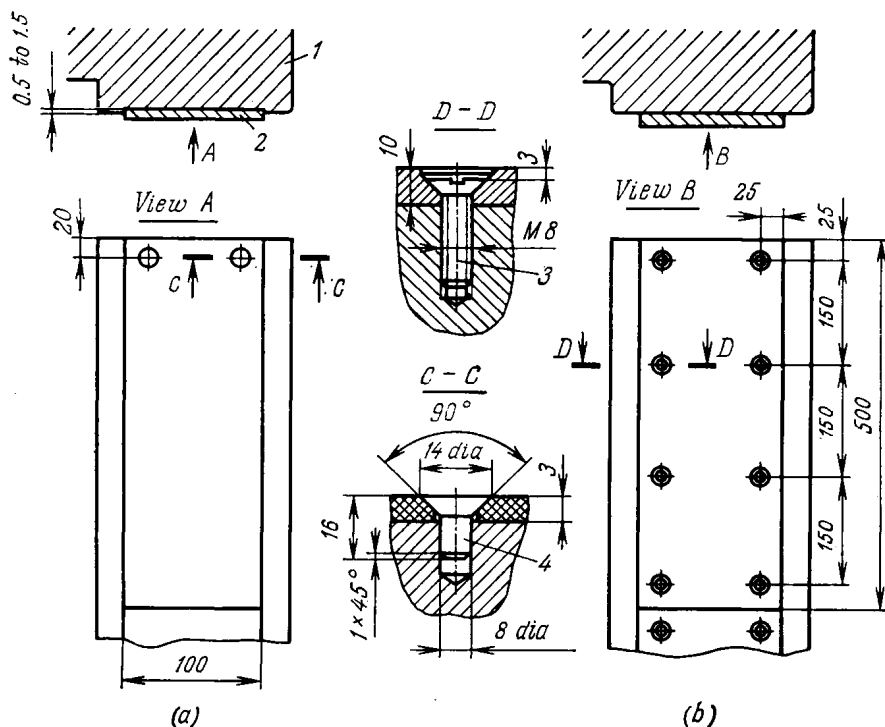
Screw fastening of adhesive-bonded way strips
